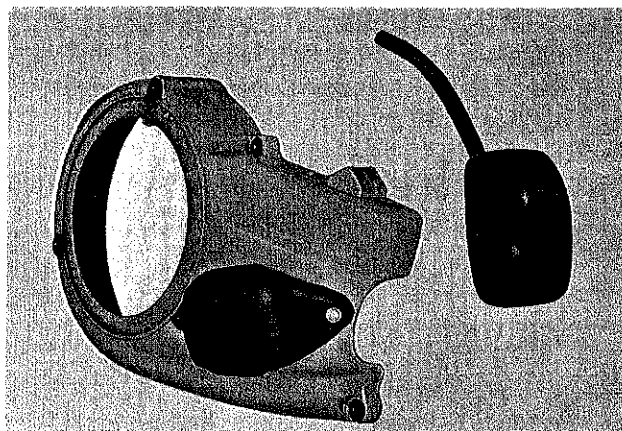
The spark plug cover riveted to the fan housing, replaces the former combination cover, boot and lead wire.
